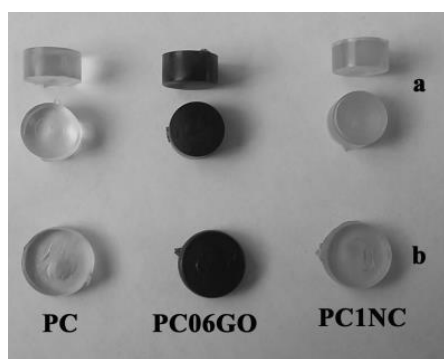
The shape of specimens after injection a) before b) after compressive test
